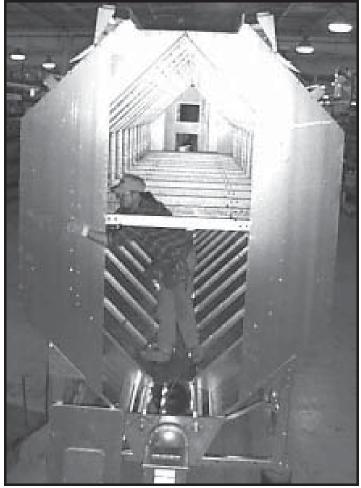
(Rear view) Plenum support channels installed through length of dryer.
